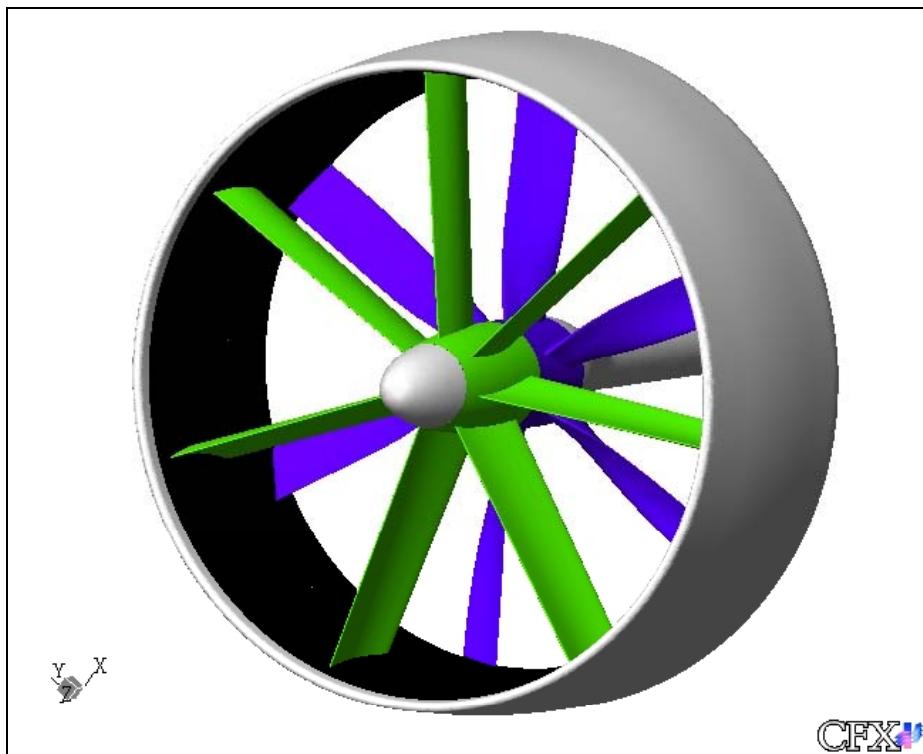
General Arrangement of the Propulsor Assembly (Port Assembly, View From Aft)
